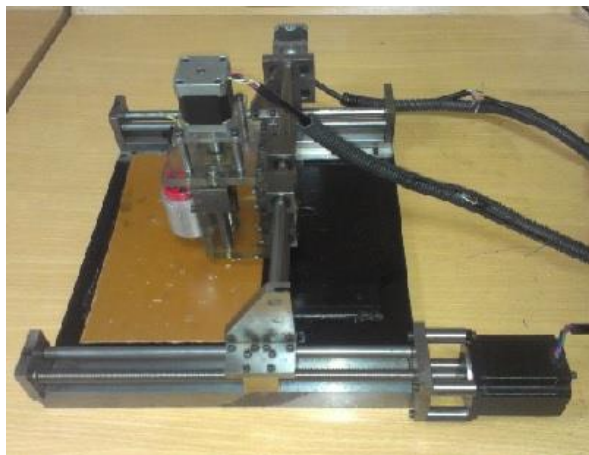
Proposed Setup Installed in PCB Drilling Machine
